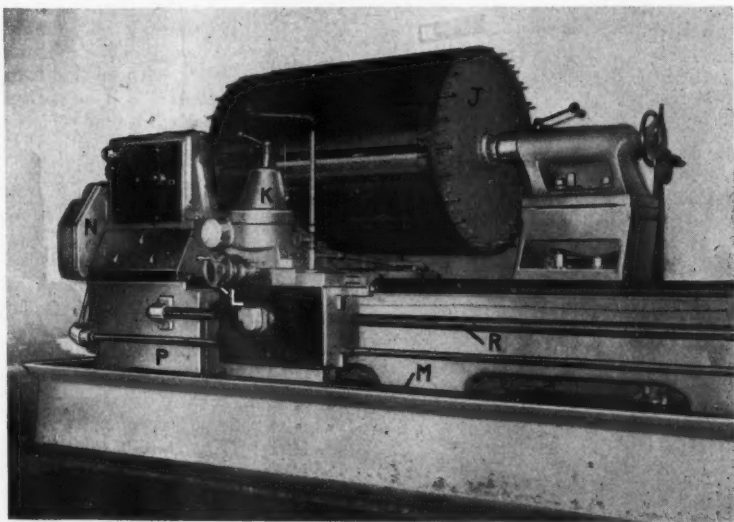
Close-up view of a hardening operation on a lathe bed on a new Romi machine, fitted with Cincinnati Flamatic equipment
